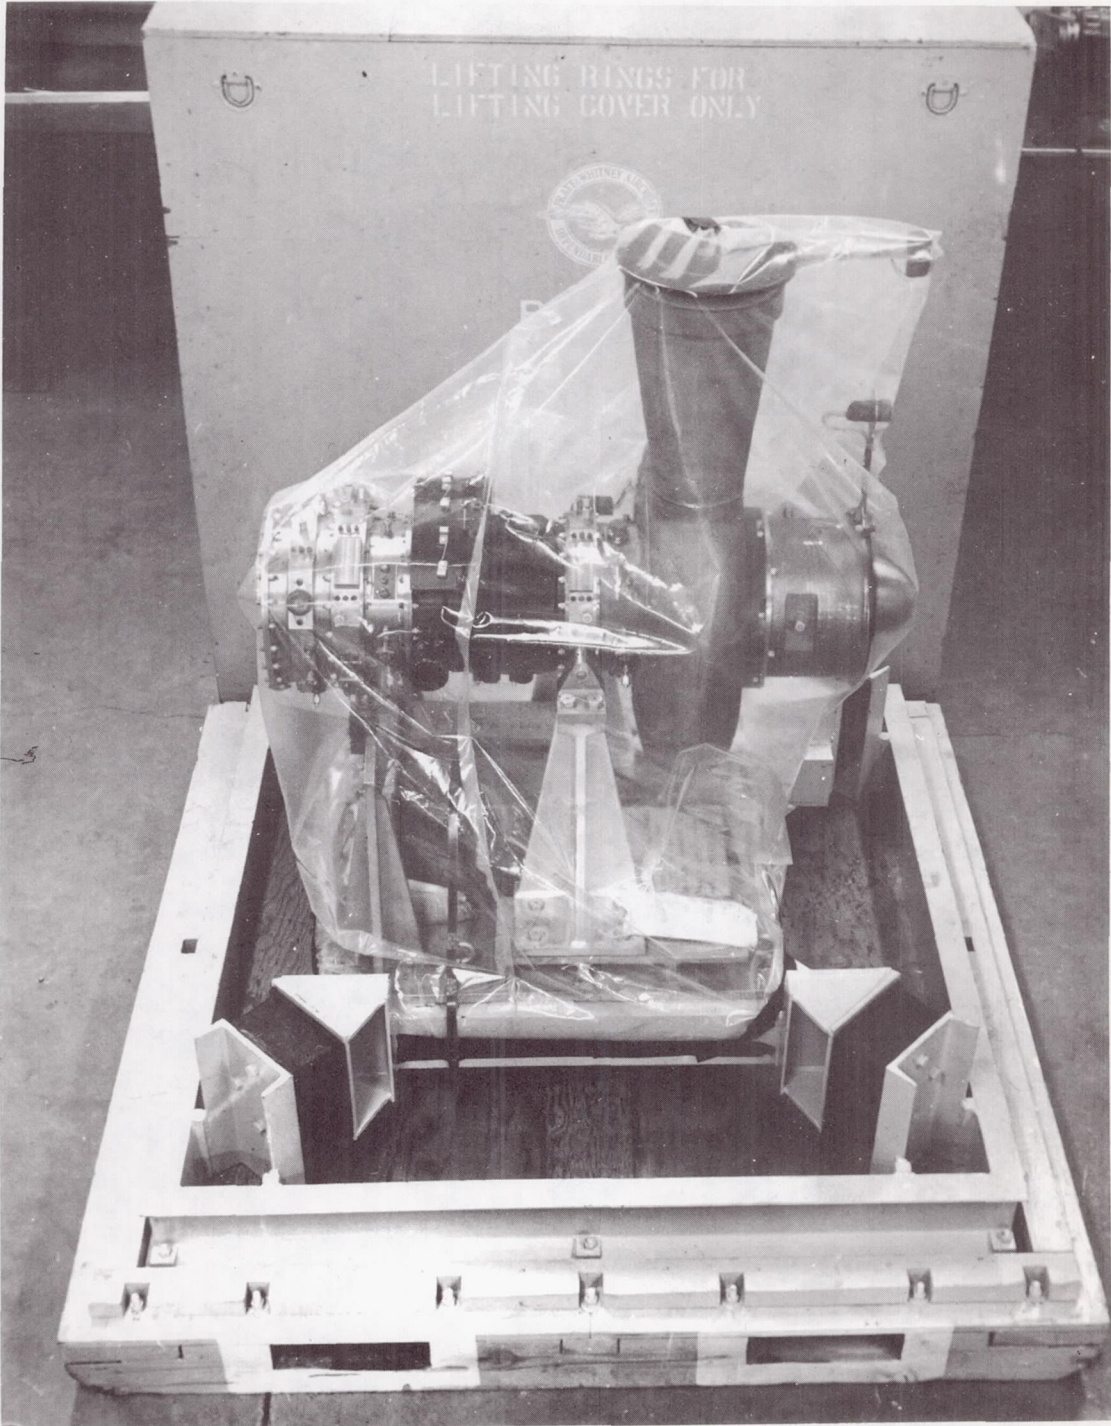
Turboalternator Mounted in Shipping Container (CN-10105)
